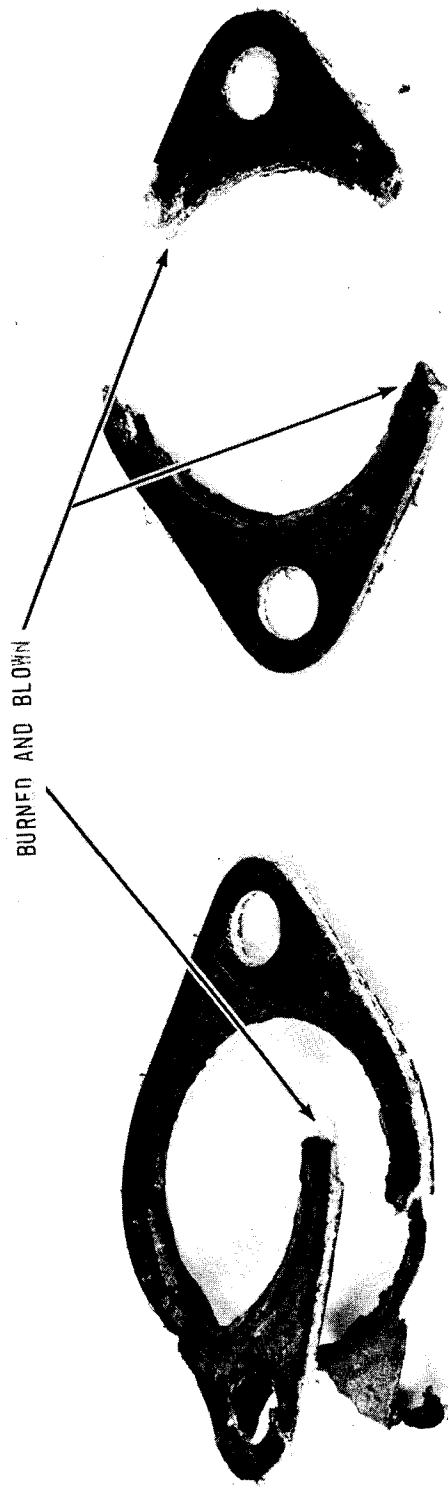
FAILED ENGINE EXHAUST FLANGE GASKETS
